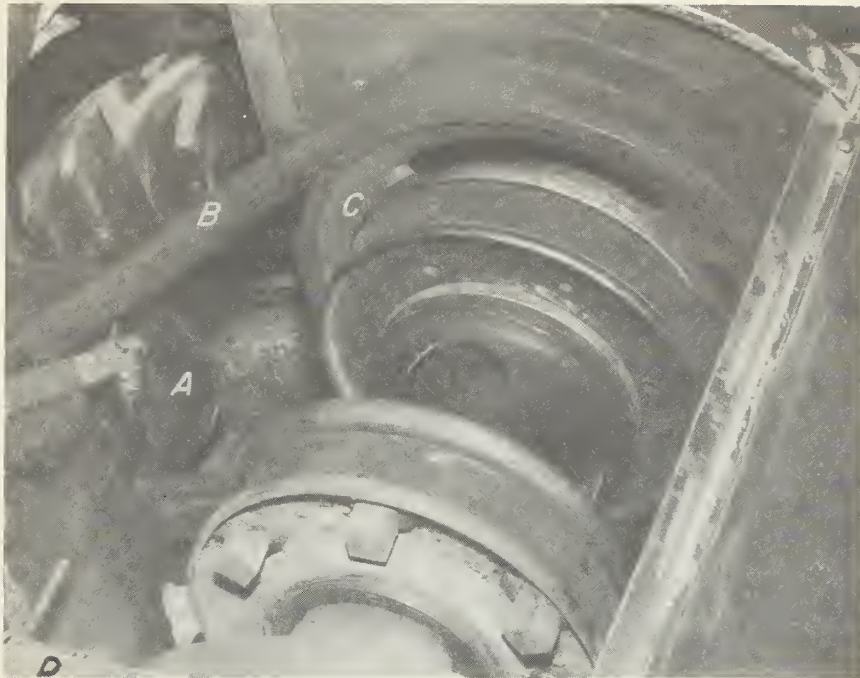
A, Centrifugal clutch; B, double V belt; C, double V, 7.8 inch pulley; D, wing nut bolt for holding down metal cover.
